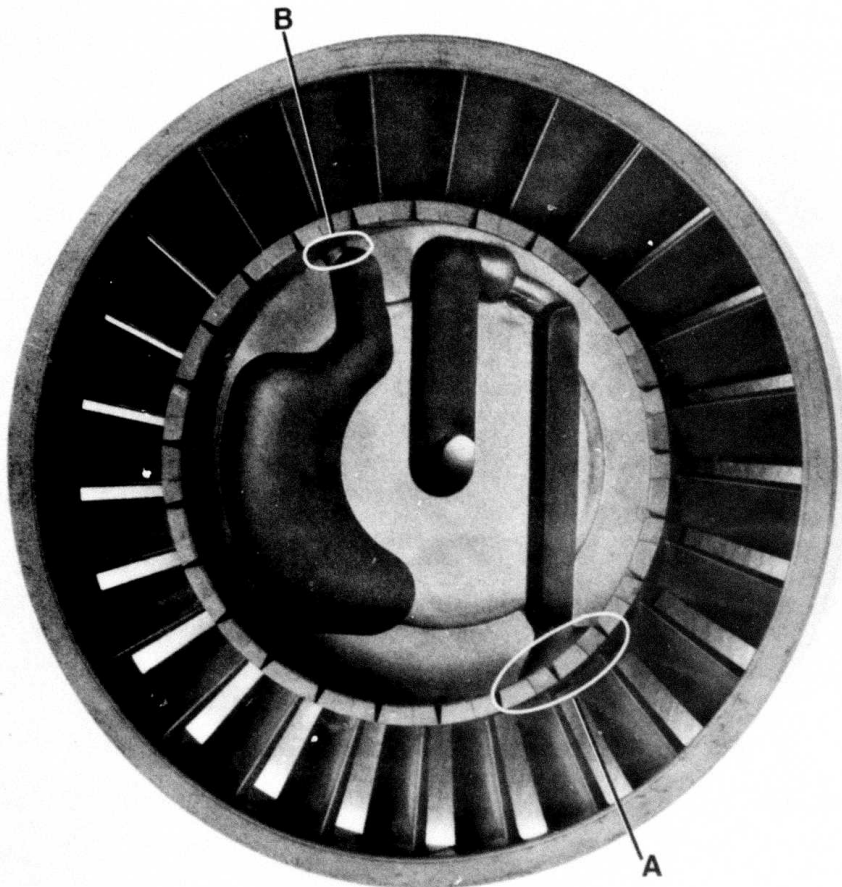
Sprue Detail of Design D' Stator Tool
